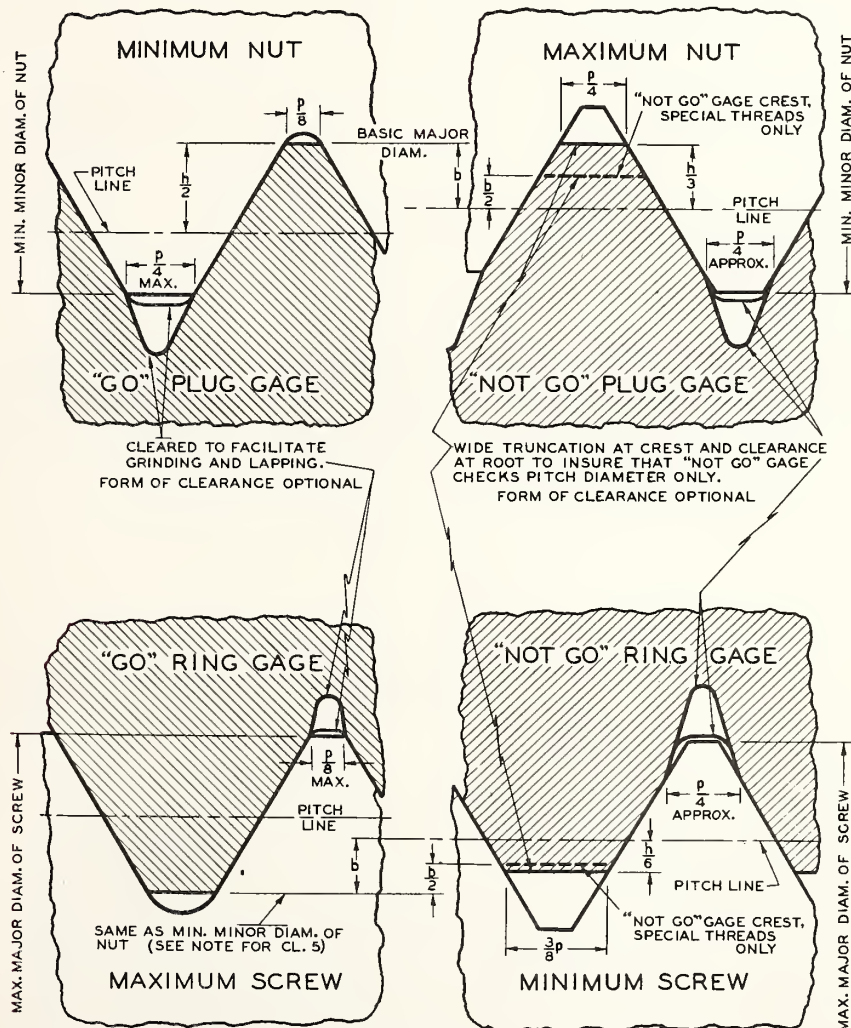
Thread form of "go" and "not go" thread plug and ring gages.
